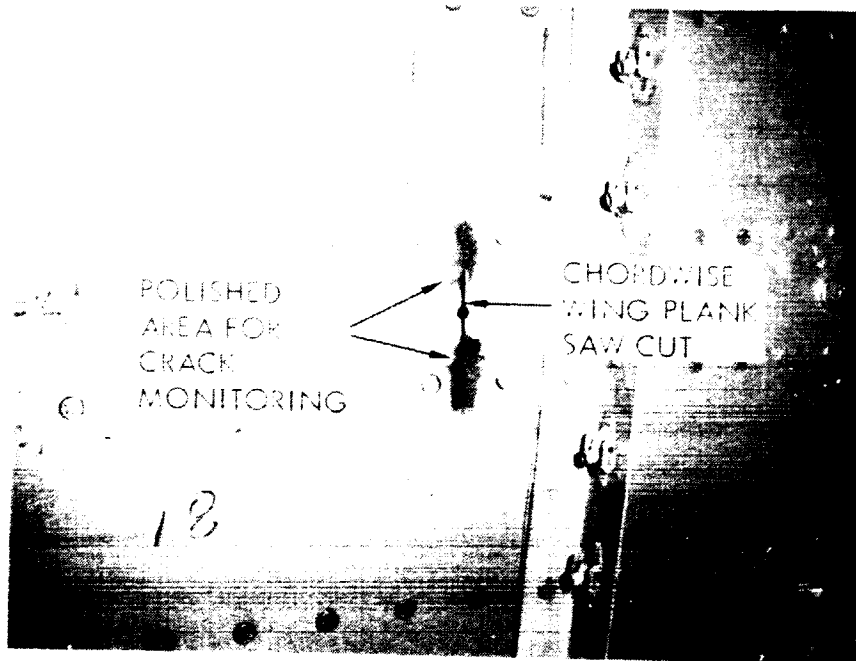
Saw Cut Between Stringers - Lower Surface at W. S. 180
